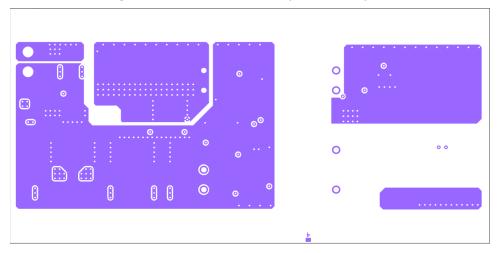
RDR-85SLR Mid-Layer 4 PCB Layout.
